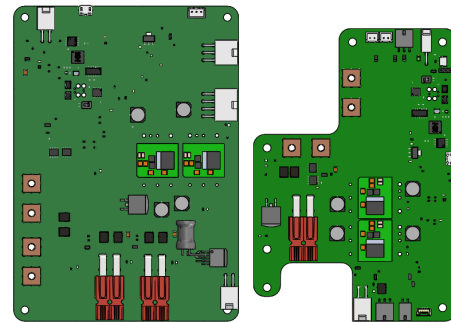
Talos PCB (left) and equivalent Triton PCB (right)
